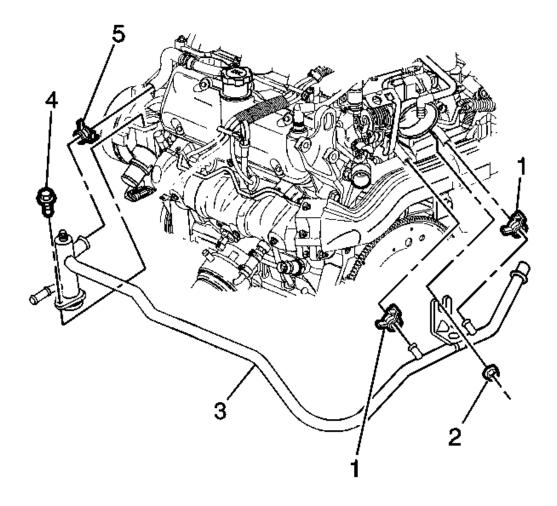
Thermostat Bypass Pipe & Components Courtesy of GENERAL MOTORS CORP.
